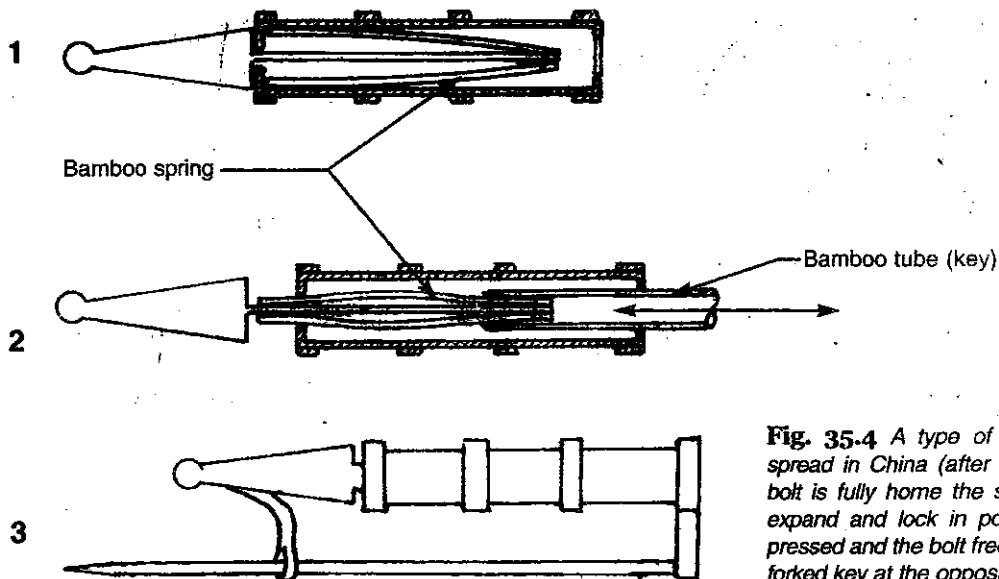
A type of spring padlock widespread in China (after Hommel,r). When the bolt is fully home the springs which it bears expand and lock in position; they are compressed and the bolt freed by the insertion of a forked key at the opposite end of the padlock.
